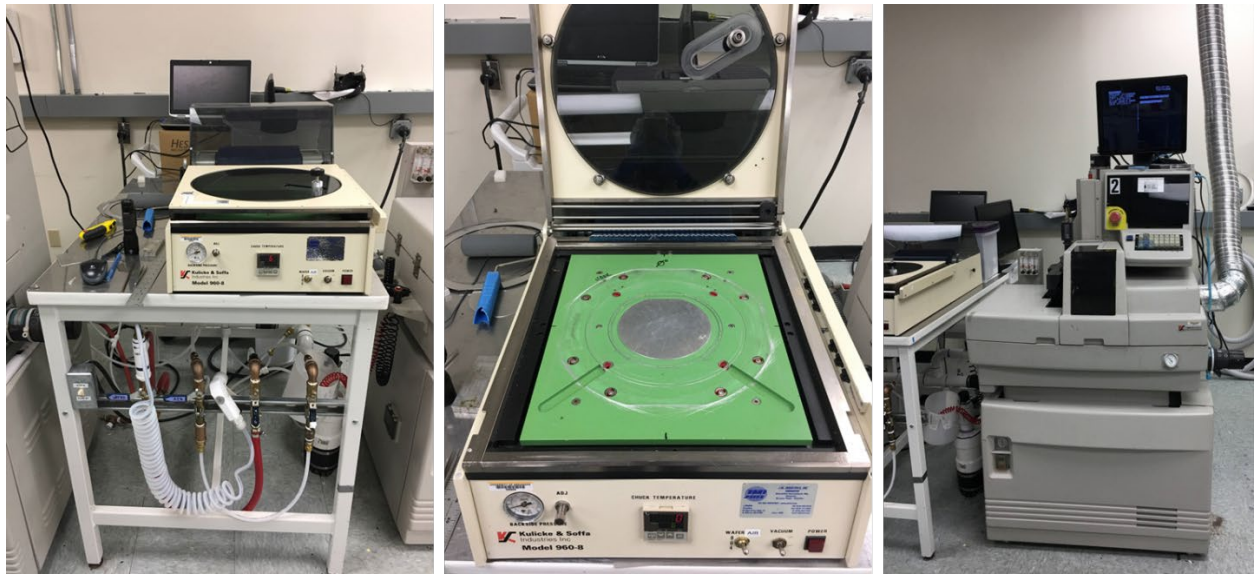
Kulicke & Soffa wafer mounting chuck (left and middle), and dicing machine (right).
